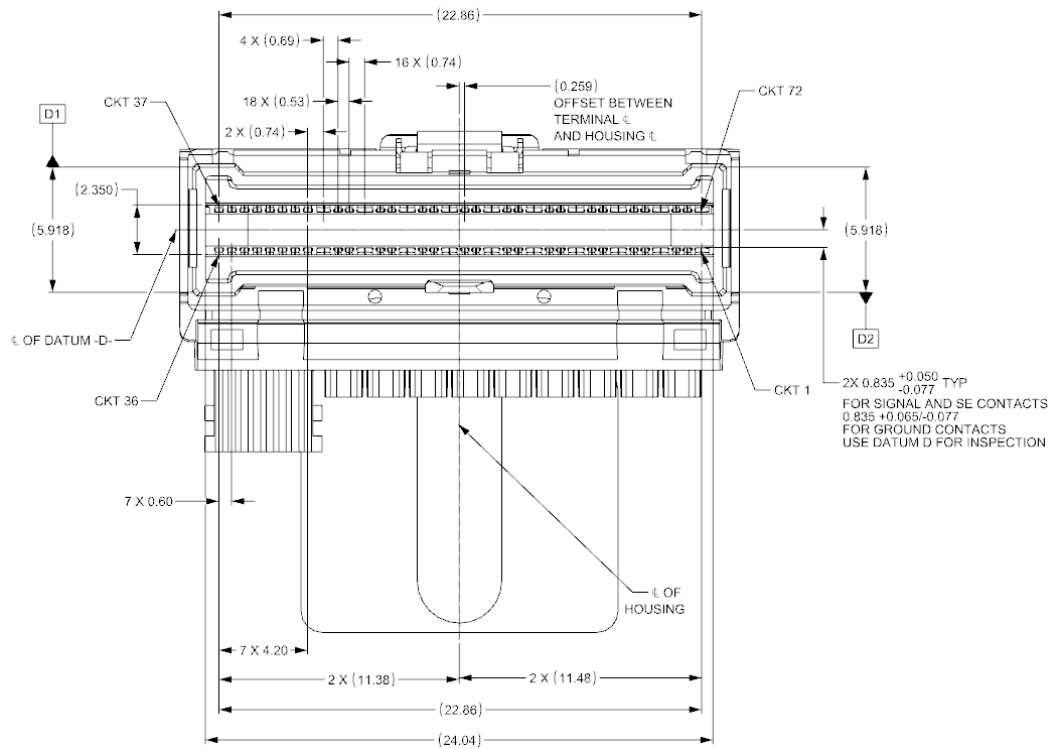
Top View of Free-Side Connector in Relation to Housing
